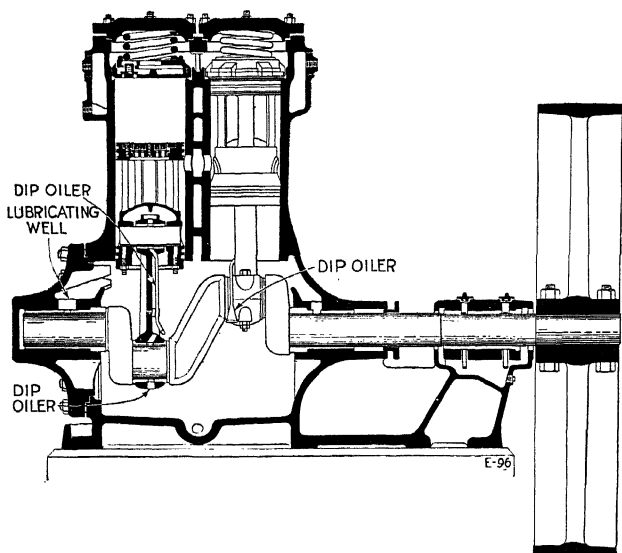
Splash-oiled ammonia compressor with dip oilers for crankpin and wristpin bearings. (Courtesy Socony-Vacuum Oil Co.)
